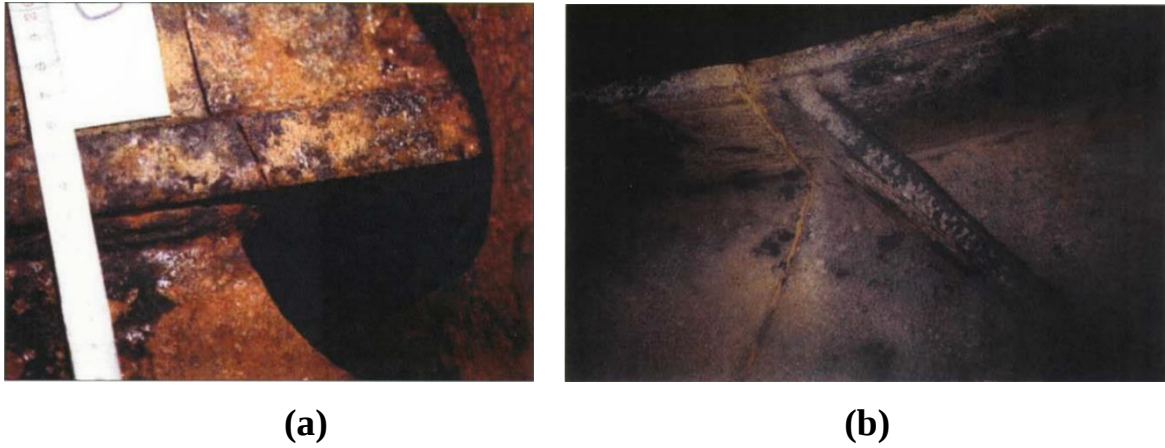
Fatigue crack on a double hull tanker. (a) Fatigue crack in the side longitudinal. (b) Fatigue crack at the base of the strut. [5]
